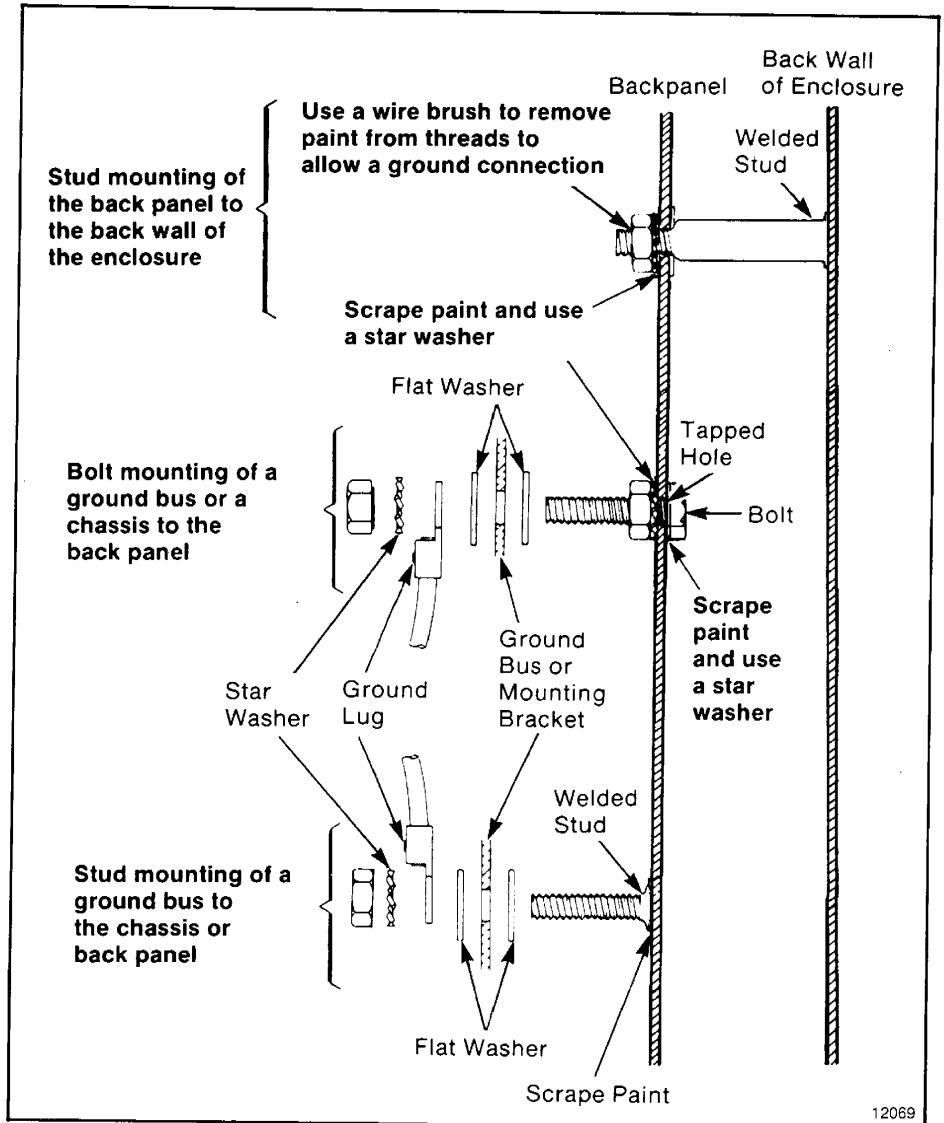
Hardware Needed for Mounting the Backpanel Inside Your Enclosure
